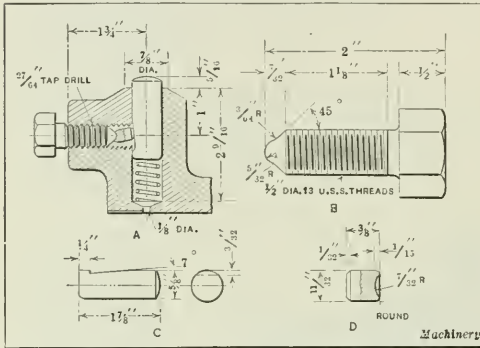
Standard Design of Spring Plunger Construction for Jigs and Fixtures
